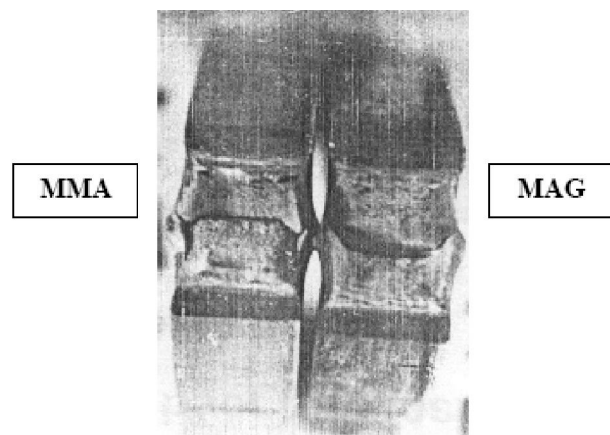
Macrograph of fracture surface of impact tested joints produced using MMA (4mm electrode diameter) and MAG welding processes.
